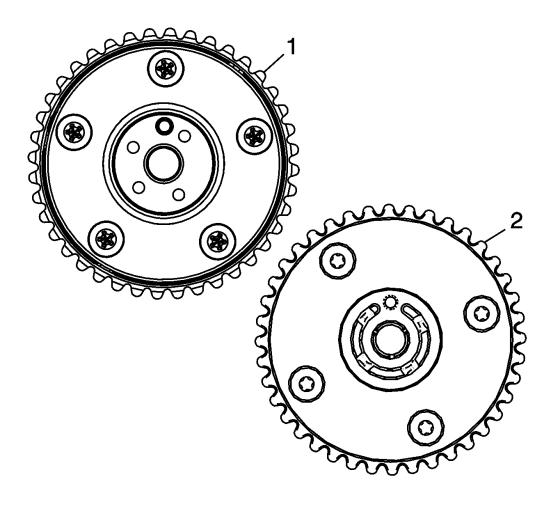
Identifying Camshaft Position Actuators Courtesy of GENERAL MOTORS COMPANY
